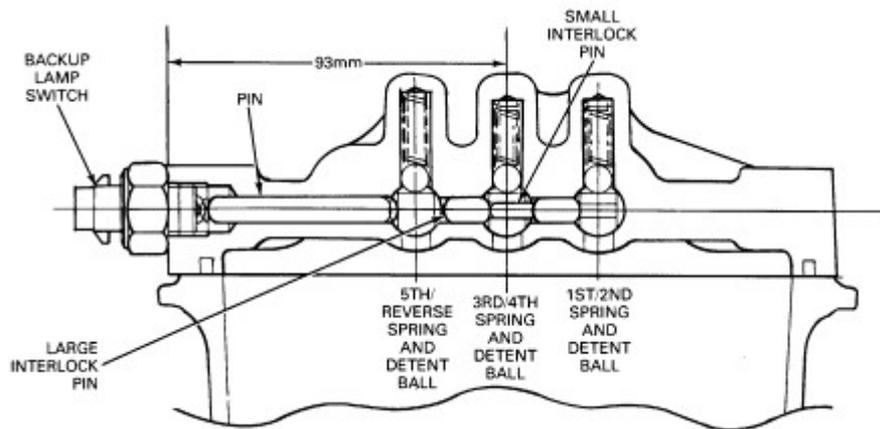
Locating Backup Lamp Switch, Spring & Detent Balls
